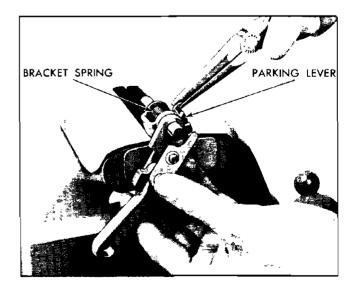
Removing Parking Bracket Spring from Parking Lever
